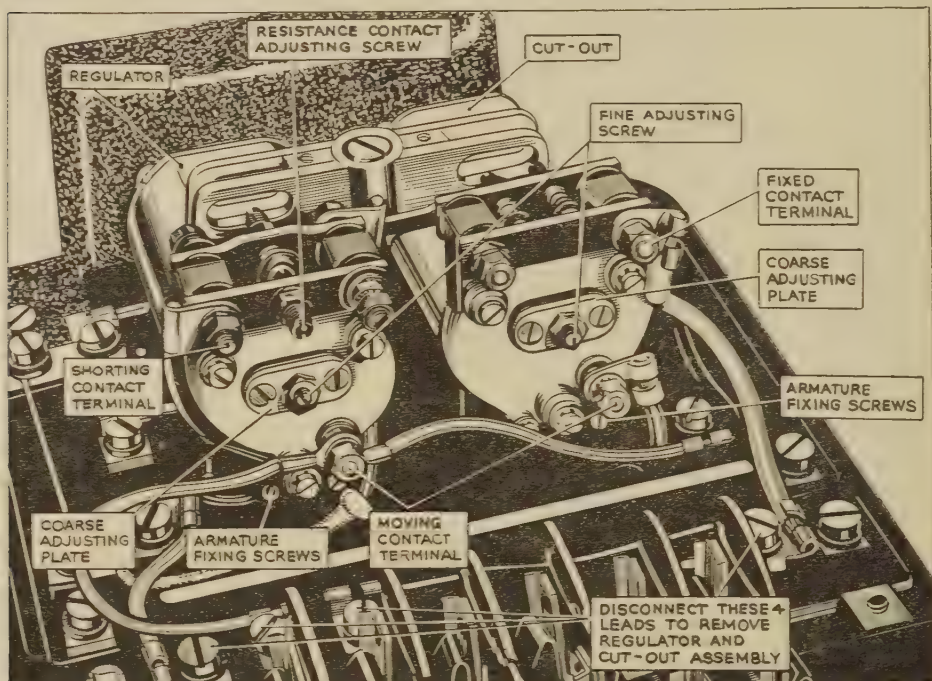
The Simms Voltage Regulator and Contact-breaker Units (Leyland).
